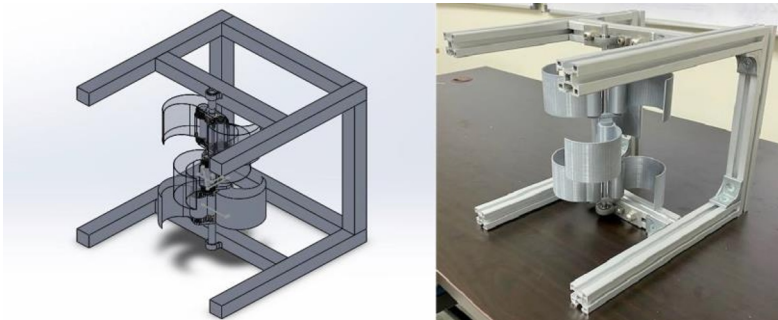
Full CAD Assembly of VAWT with frame support (left) and final VAWT assembled attached (right).
